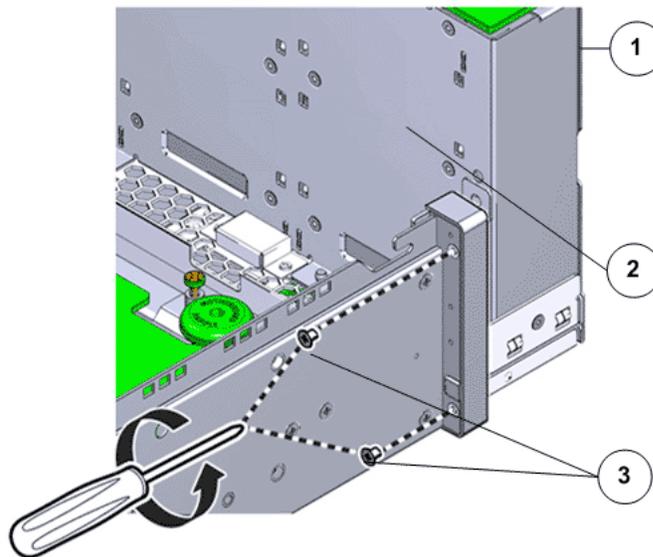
LED alarm assembly positioned over Replication Engine chassis
